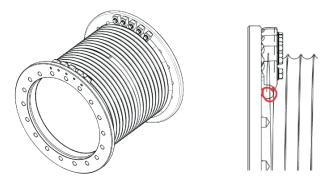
Place the rope inside the drum flange, ensure the correct position of clamps and tighten the screws at the fixed torque.
